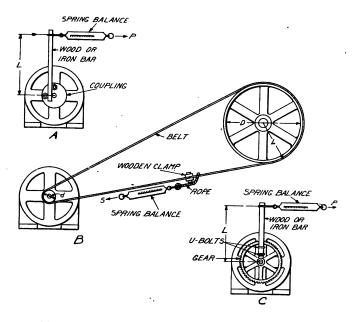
METHODS EMPLOYED TO MEASURE MOTOR TORQUE
